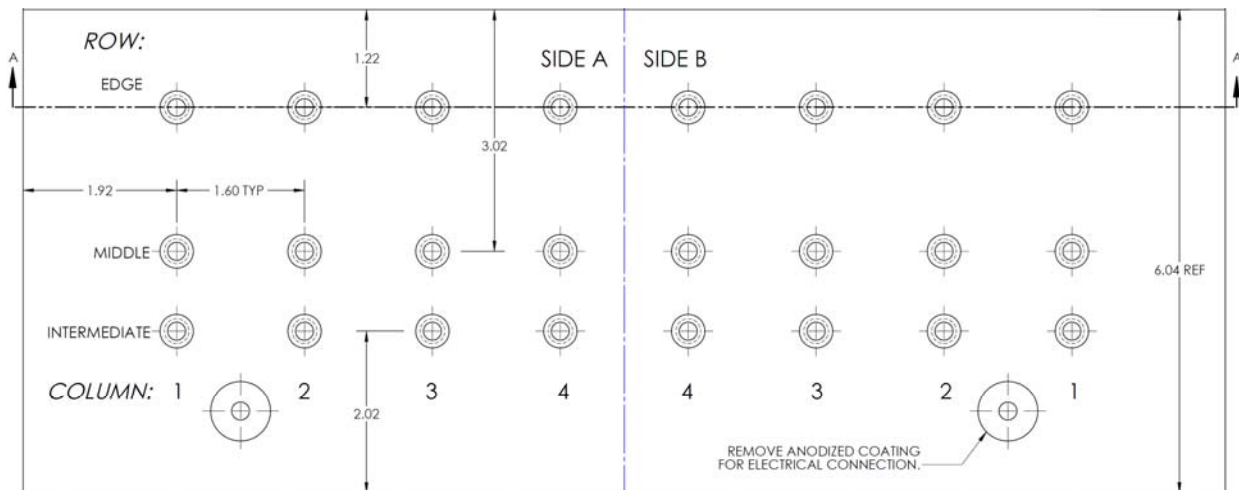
Excerpt from coupon drawing showing hole pattern
